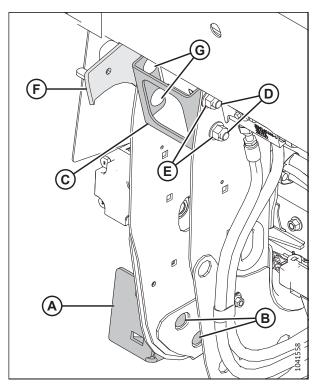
Center Header Leg without HDS Installed – Right Side
